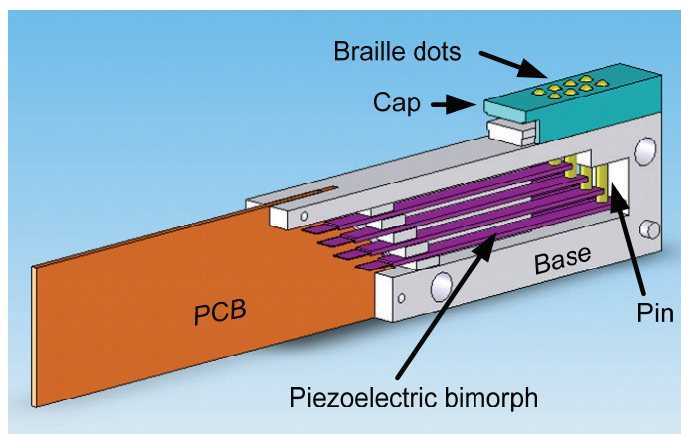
Assembly drawing of the piezoelectric Braille cell.
